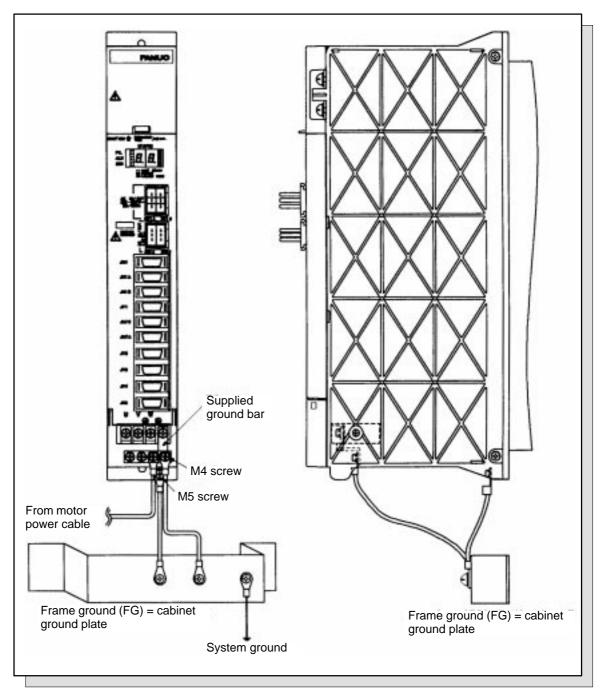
(k) Ground Cable Connection (SPM-2.2, SPMC-2.2)
